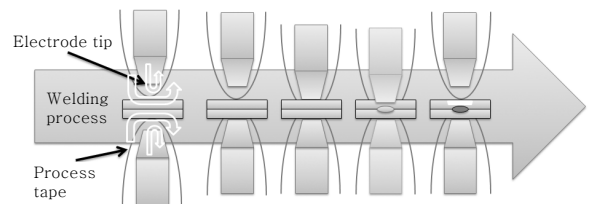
Schematic diagram of Delta-Spot welding process
